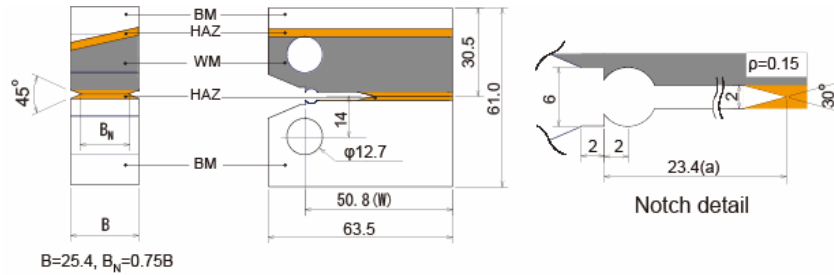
Geometry and size of a C(T) specimen with side-grooves and the sites of base metal (BM), heat affected zone (HAZ) and weld metal (WM).
